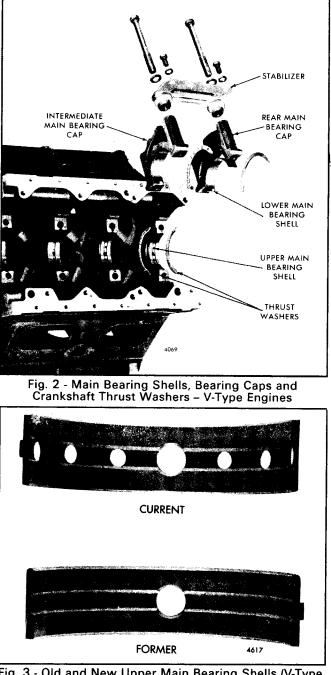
Old and New Upper Main Bearing Shells (V-Type Engines)
